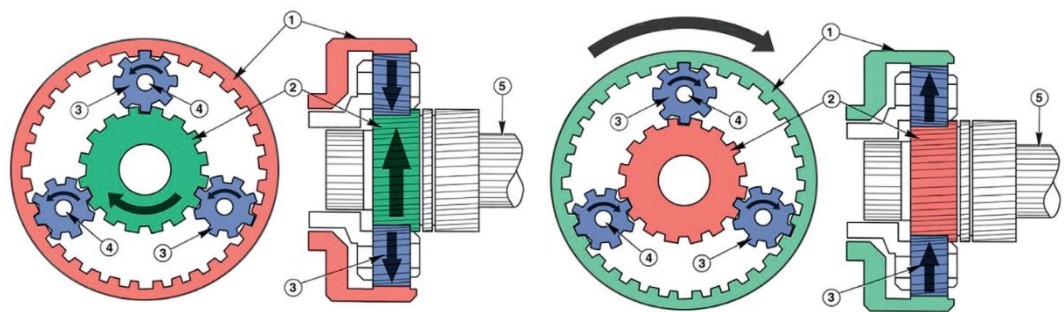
Epicyclical gears in direct and high transmission ratio respectively drive: 1, annulus; 2, sun gear; 3, planet gears; 4, planet carrier; 5, sun gear shaft
